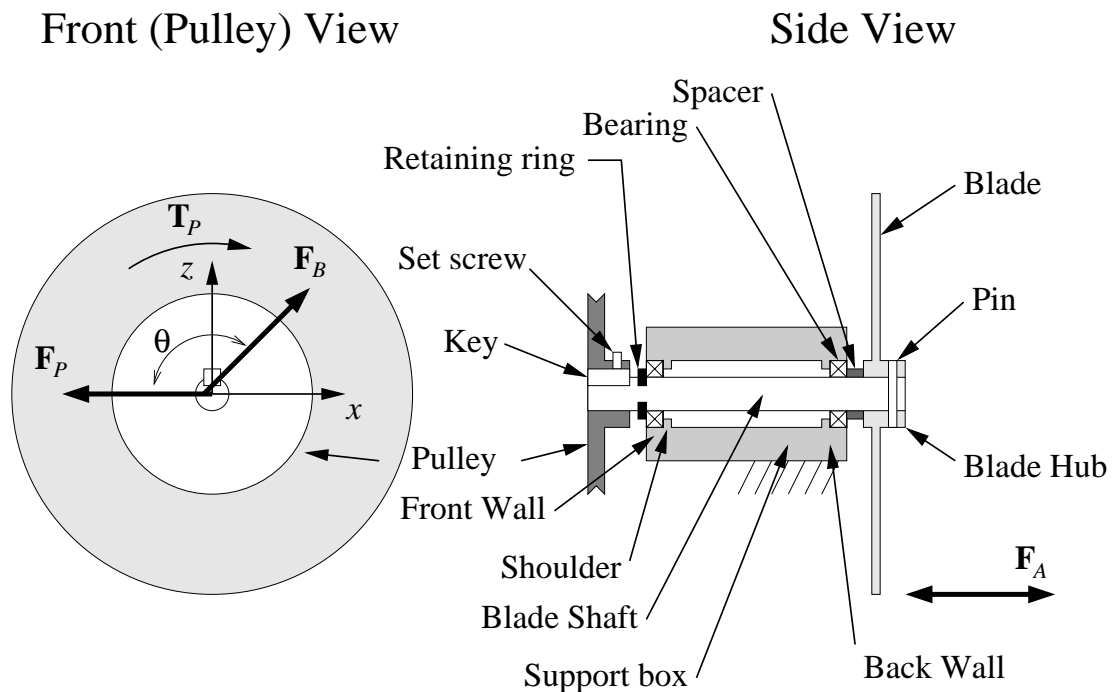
Chop Saw Blade Shaft Layout and Loading(Not to scale)
